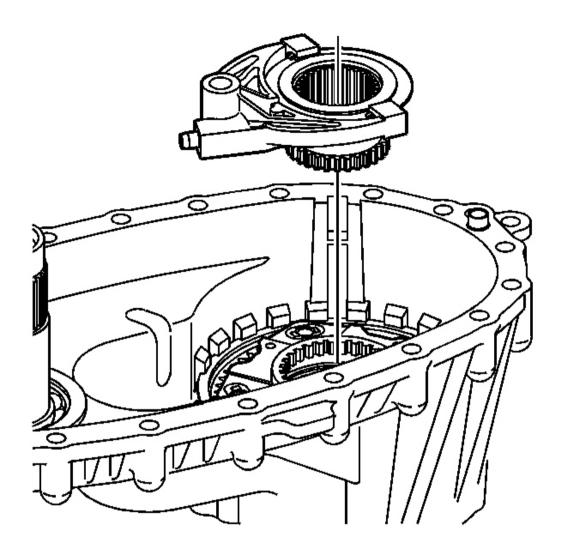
Identifying High/Low Range Sleeve With The High/Low Range Shift Fork Courtesy of GENERAL MOTORS CORP.
